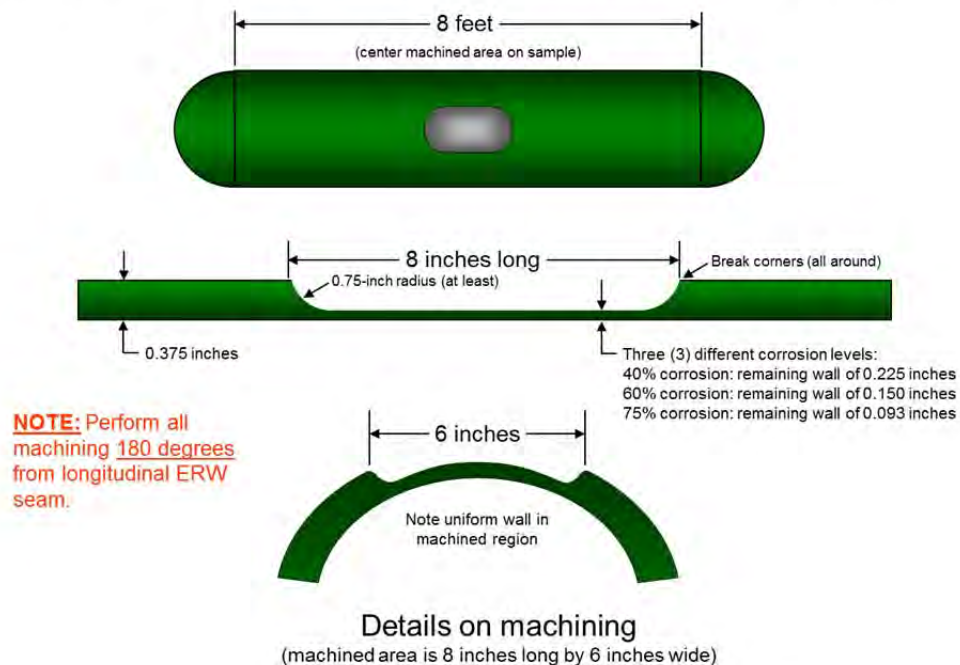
Schematic diagram showing machined corrosion sample
